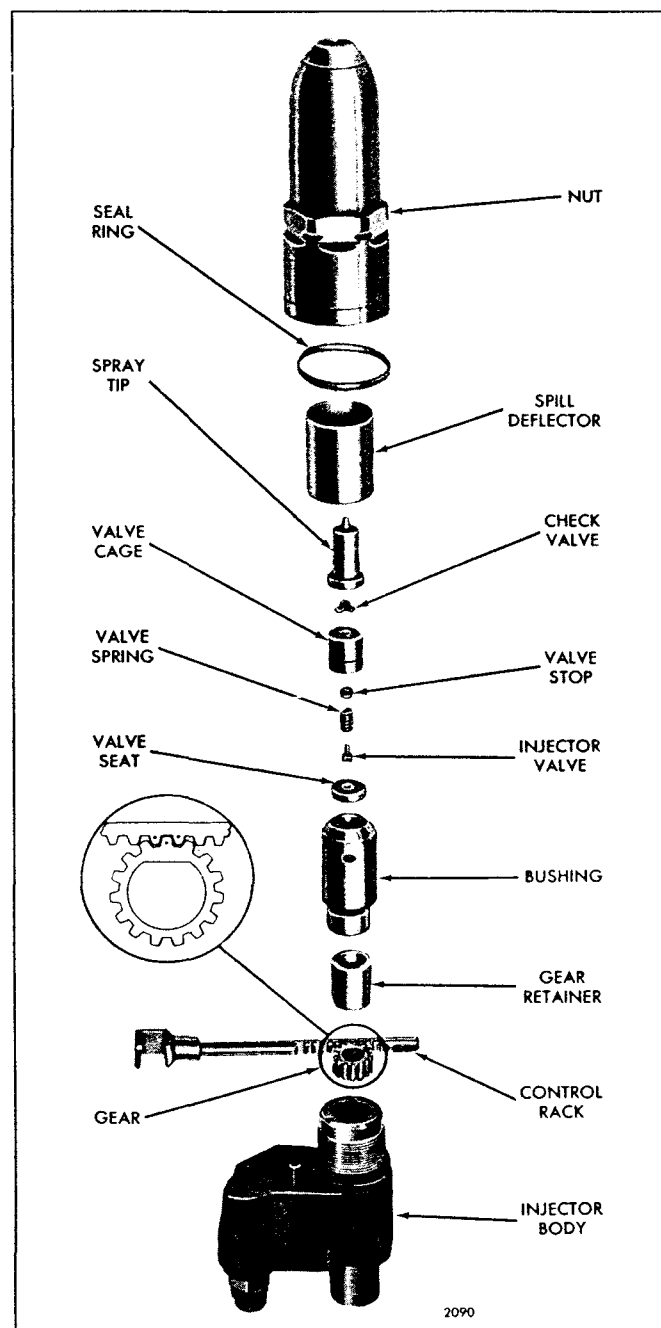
Injector Rack, Gear, Spray Tip and Valve Assembly Details and Relative Location of Parts
